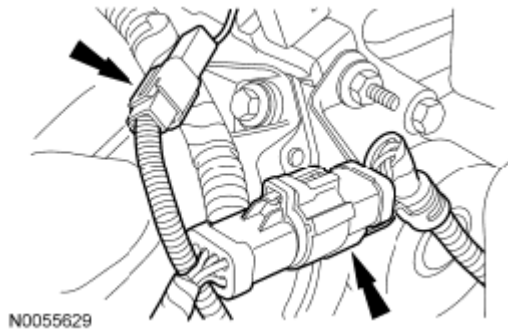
Locating Engine Cooling Fan Clutch Electrical Connectors
